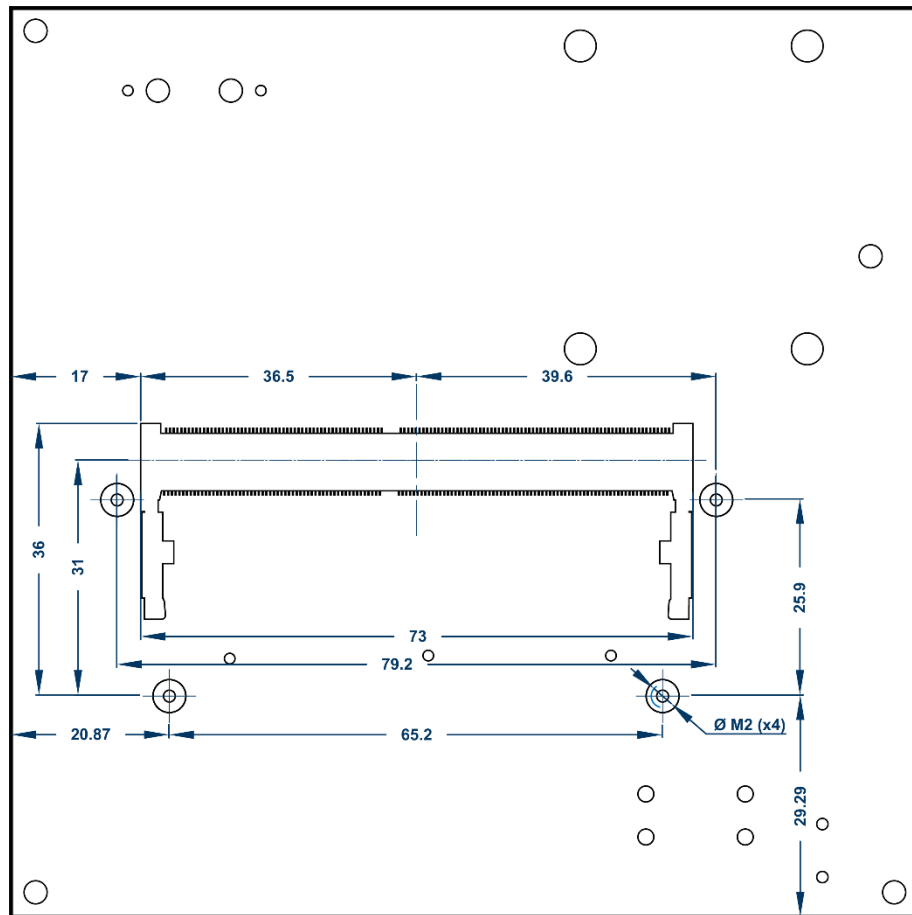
Dahlia Carrier Board SoM and Spacers Position (in millimeters) – Top Side
